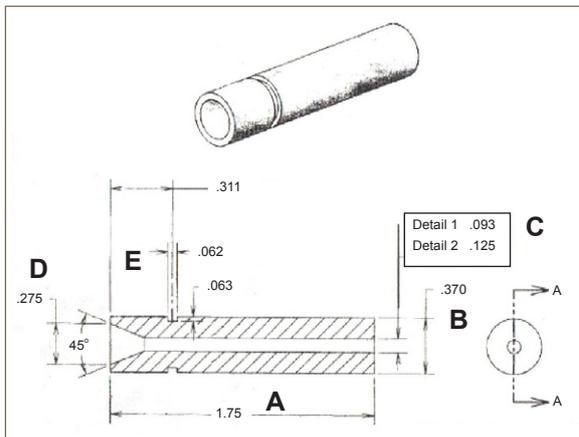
Specification drawing for Cerbide part produced by LPIM
